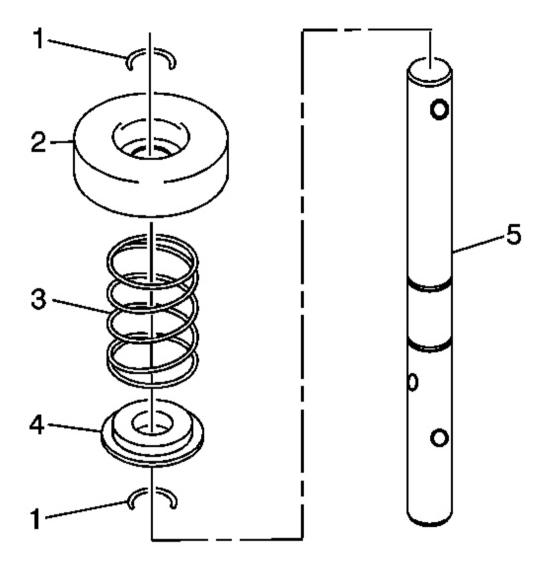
Inner/Outer Spring Seat, Retainers & Shift Rod Courtesy of GENERAL MOTORS CORP.
